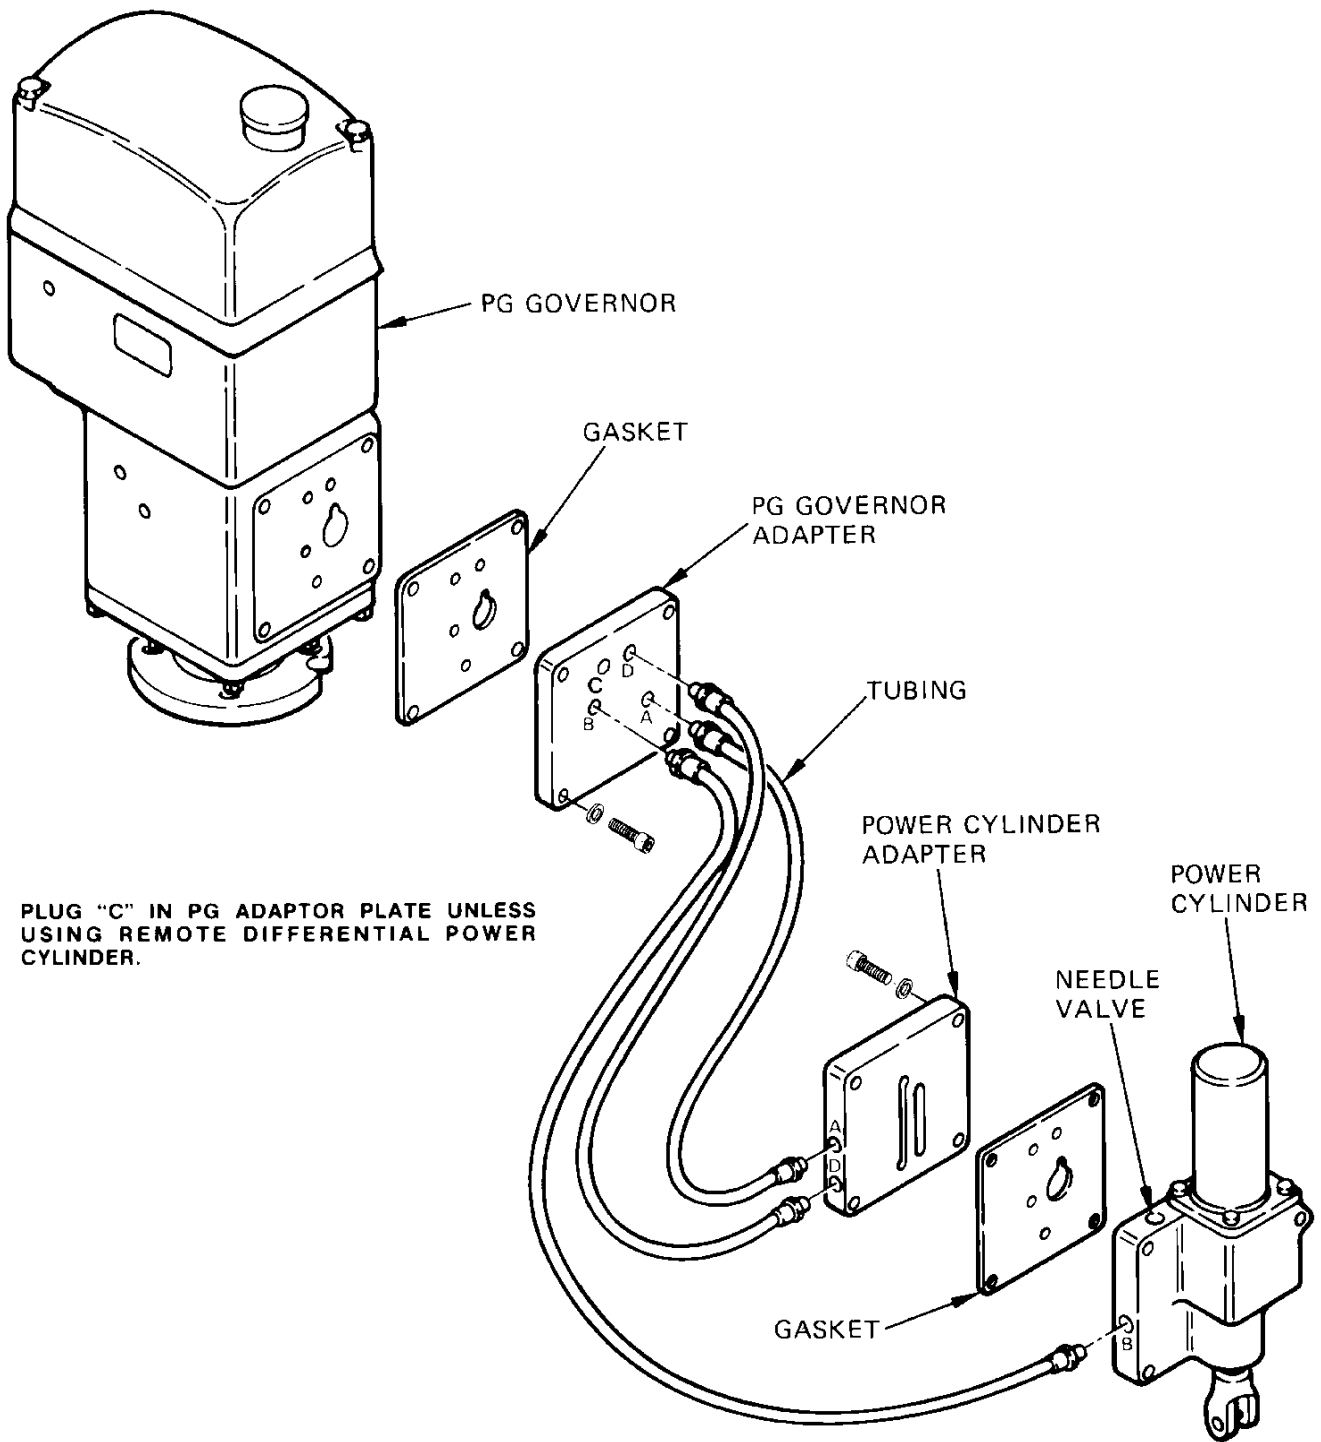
Remotely Located (Spring-Loaded) Power Cylinder
